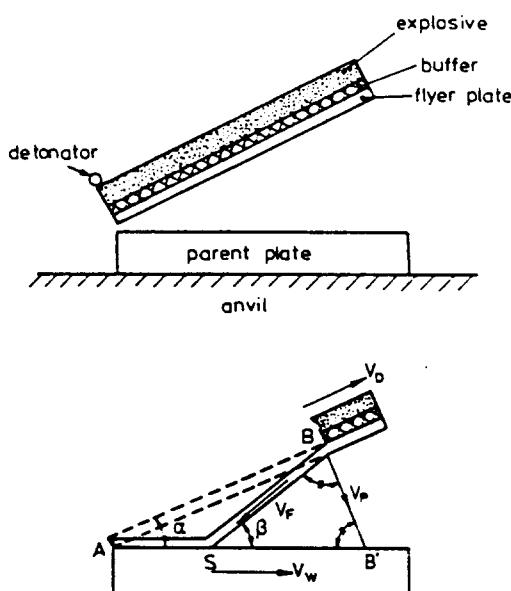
Schematic illustration of explosive welding process and its dynamic variables.
